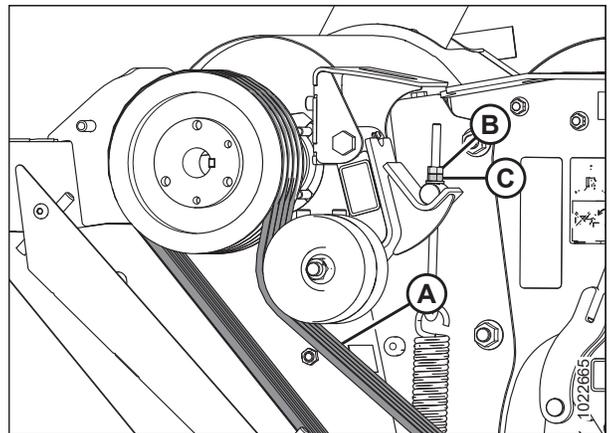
Jam Nut and Adjuster Nut on Left Side of Rotary Disc Pull-Type
